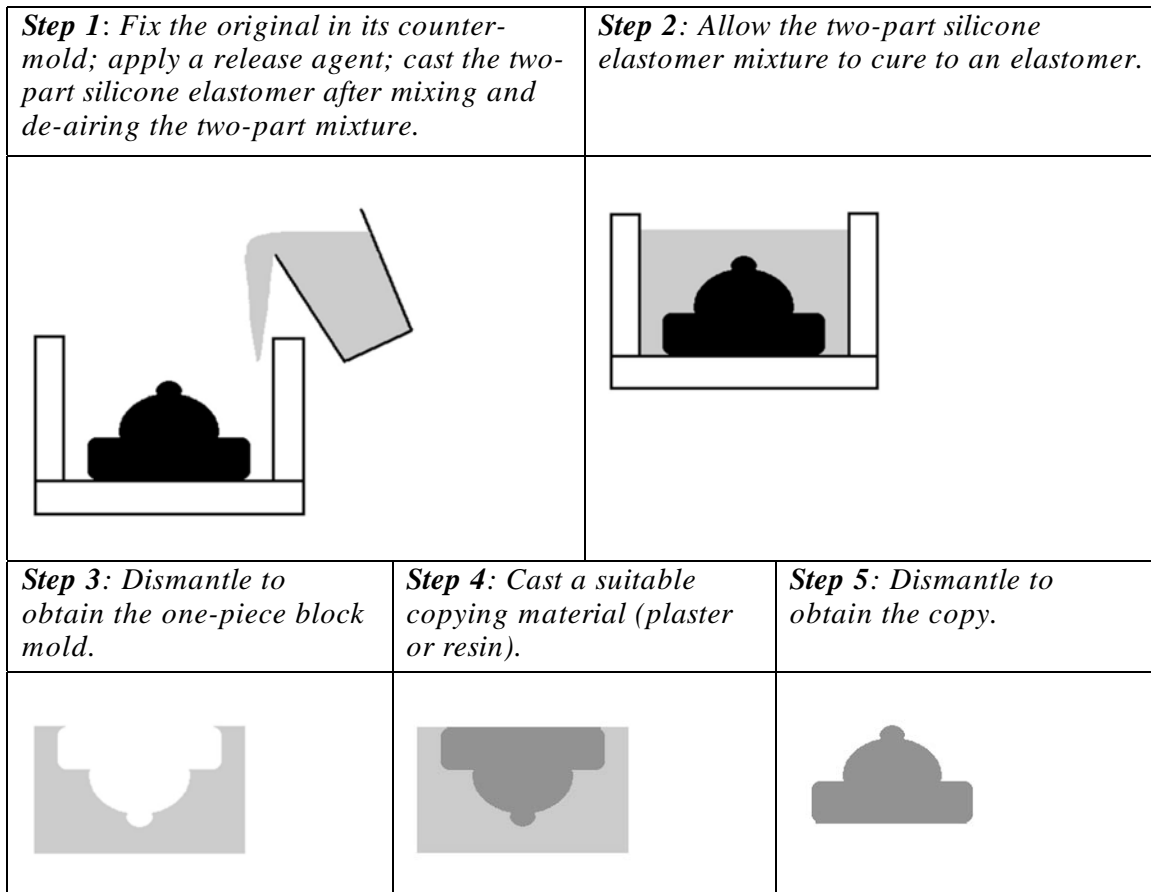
Process steps for making a one-piece silicone elastomer block mold (original in black, countermold in white; two-part silicone elastomer mixture and cured silicone mold in light gray; copy in dark gray).
